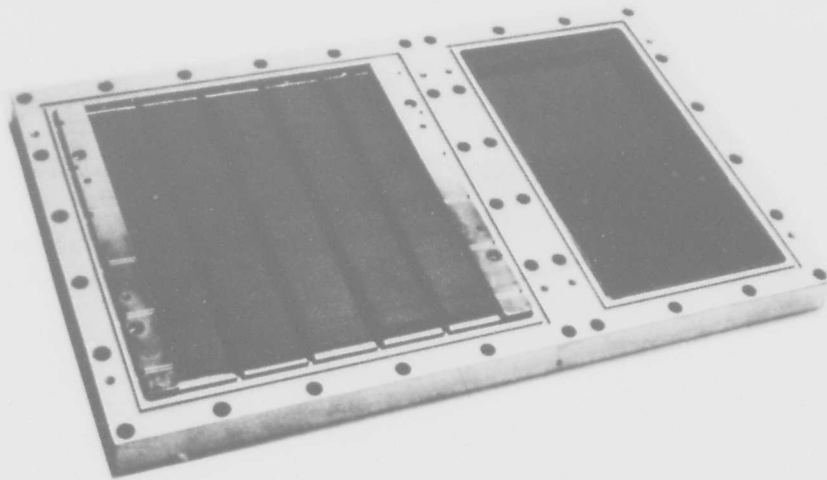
RTM Arrangement of a Two-Chamber Mold with Inserted Fibre Preform (left) and Molten Precursor (right)
